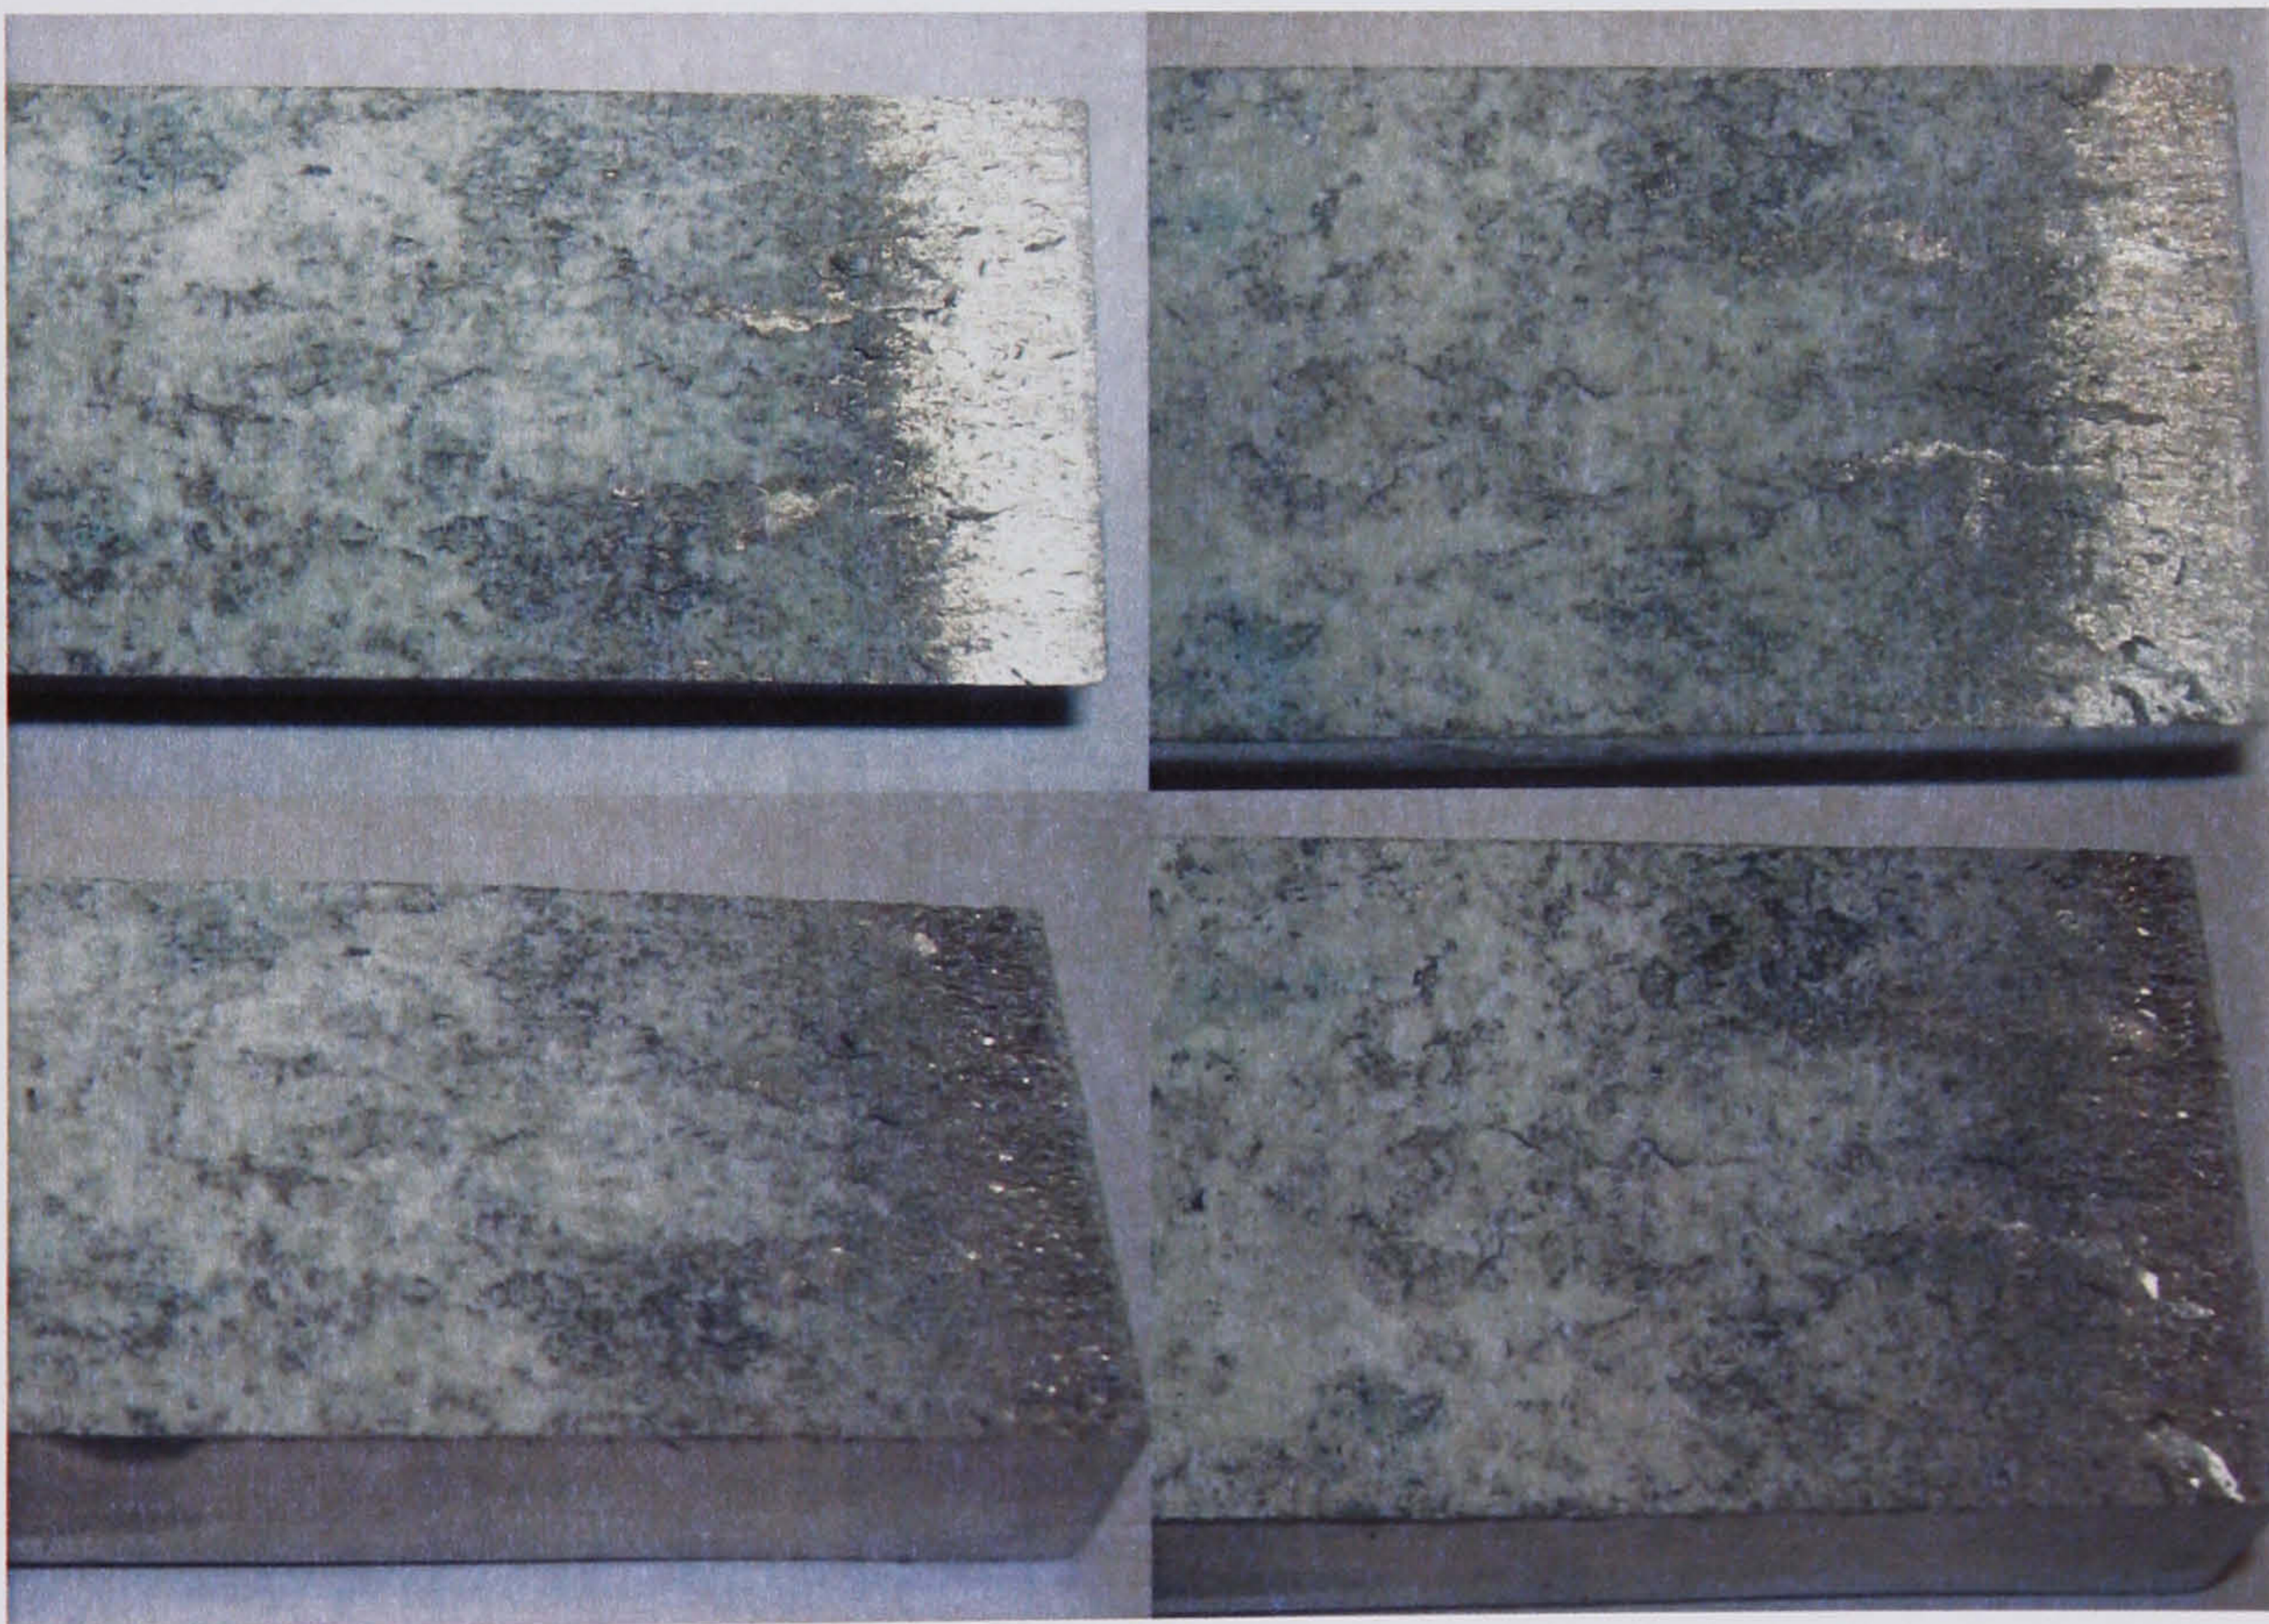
Photographs of fracture surface of DCB specimens.
